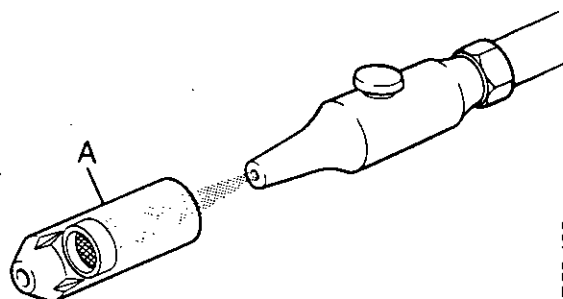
CLEANING THE FILTER FOR THE BY-PASS VALVE
